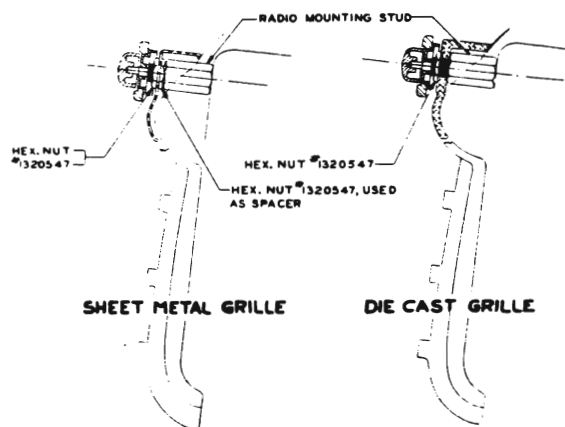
Radio Installation—Sheet Metal Grille—Series 50-70
